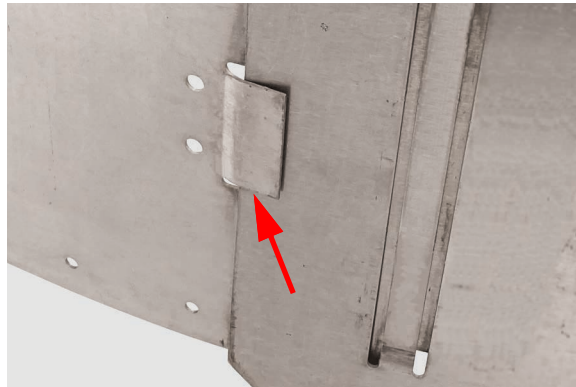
Attaching the scissor mechanism to the mounting ring.
